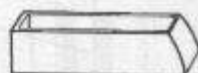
The magazine assembled and ready for the stop to be fitted.
